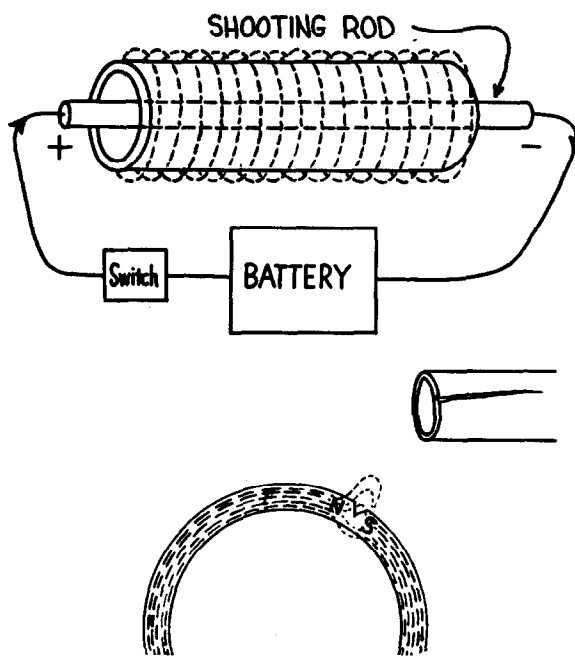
PRINCIPLE OF MAGNETIC PARTICLE INSPECTION
